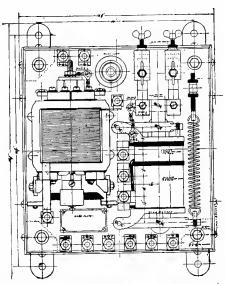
Type E-2 Panel. Regulator and Automatic Switch; Export Type.
